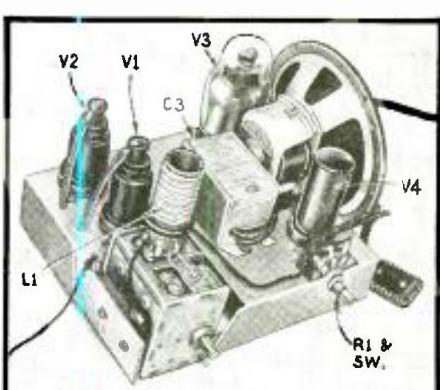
Fig. B. The chassis of the tiny set showing the positions of parts and mounting details.
